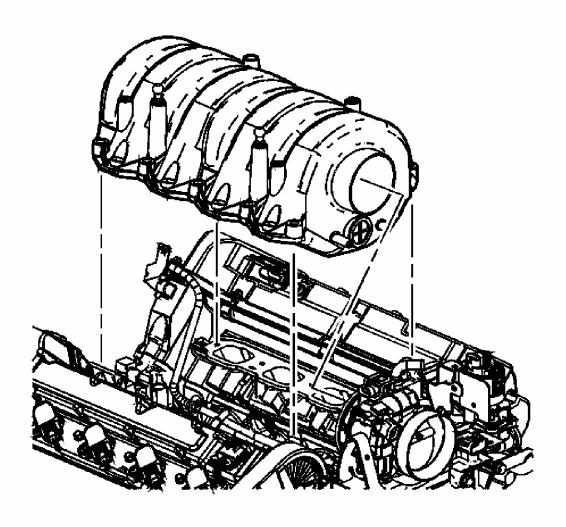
View Of Intake Manifold Courtesy of GENERAL MOTORS CORP.
